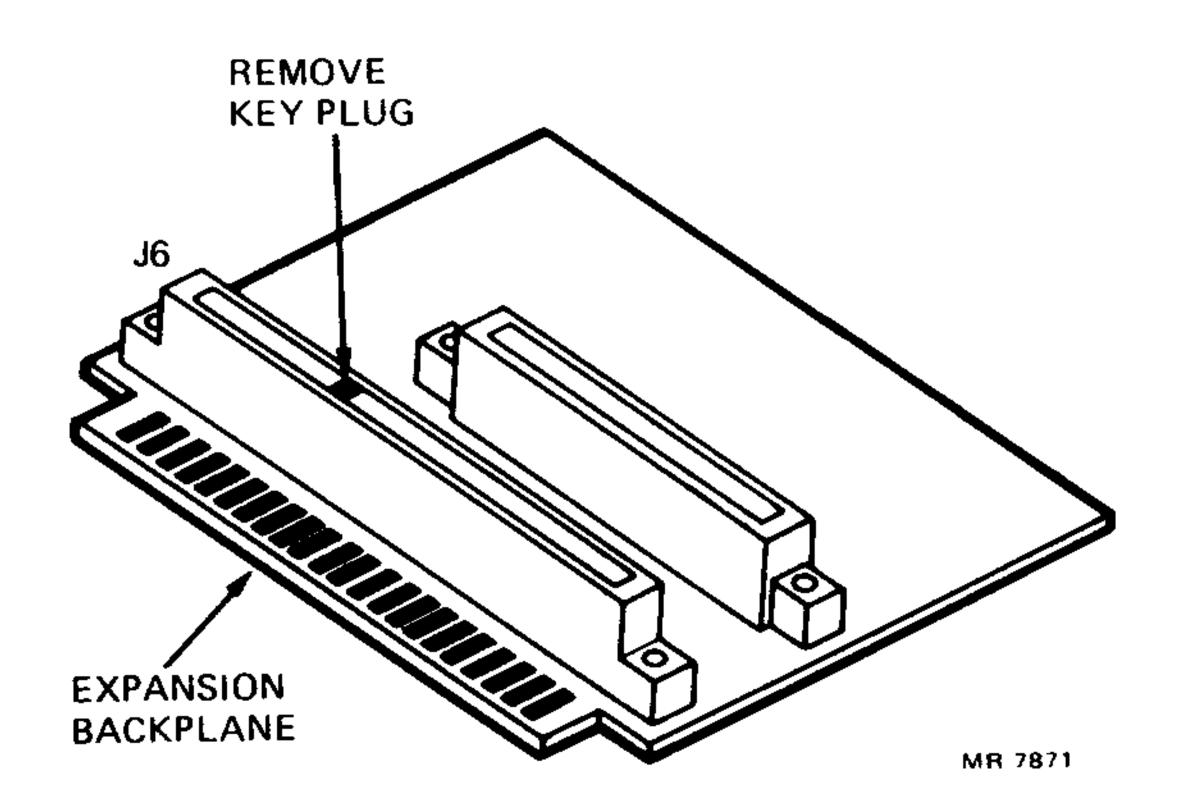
Remove the Key Plug from the Expansion Backplane
